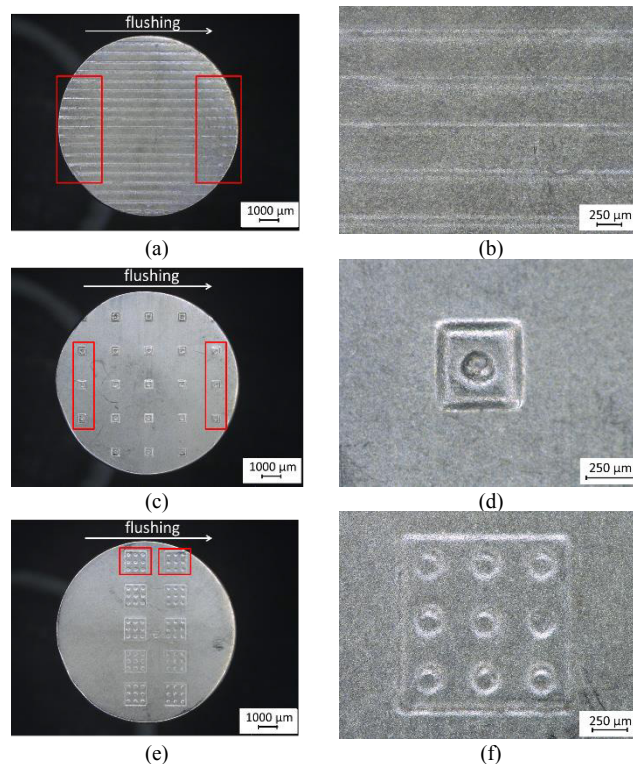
Overview and local zoom of morphological inspections on the electrochemical machined workpieces (W): (a) and (b) grooves, (c) and (d) half spheres, (e) and (f) hexagonal pyramids.
